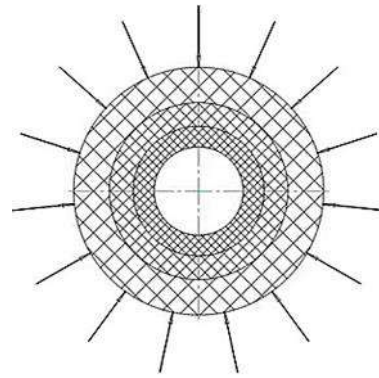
Scheme of pressing using an elastic insert formed in a set of inner folded inserts
